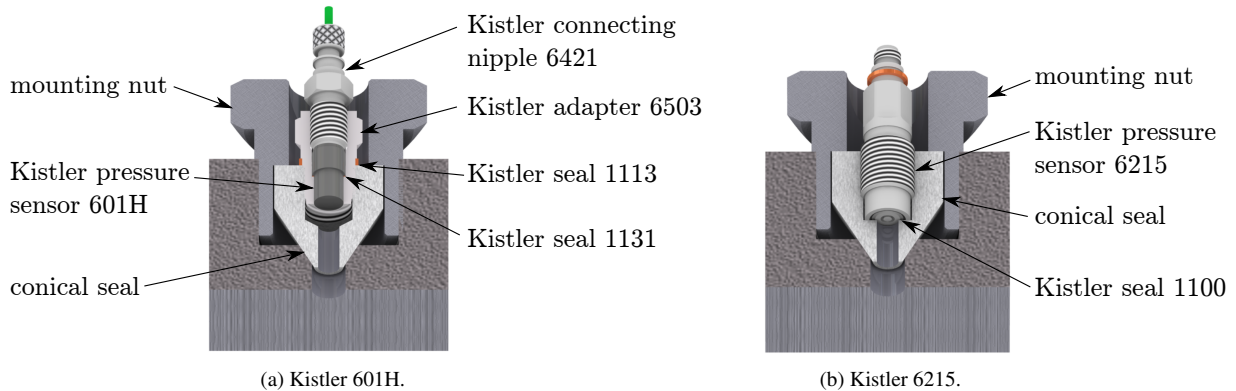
Assembly of pressure sensors in ports of the driven tube.
